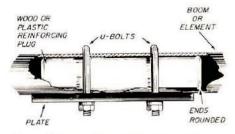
You can also strengthen a boom or element by placing a wood or plastic plug inside it. The plug should be a sliding fit inside the tube, and long enough to extend beyond the U-bolts on both sides. Round the ends, or give them a slight taper to prevent metal fatigue at a sharp corner.
